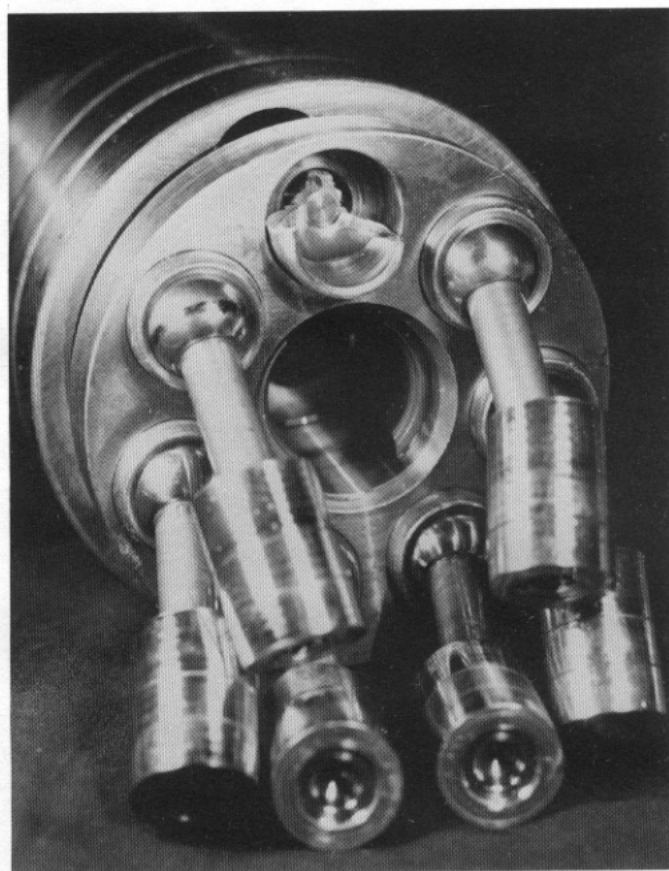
64-m antenna drive motor shaft and piston assembly
